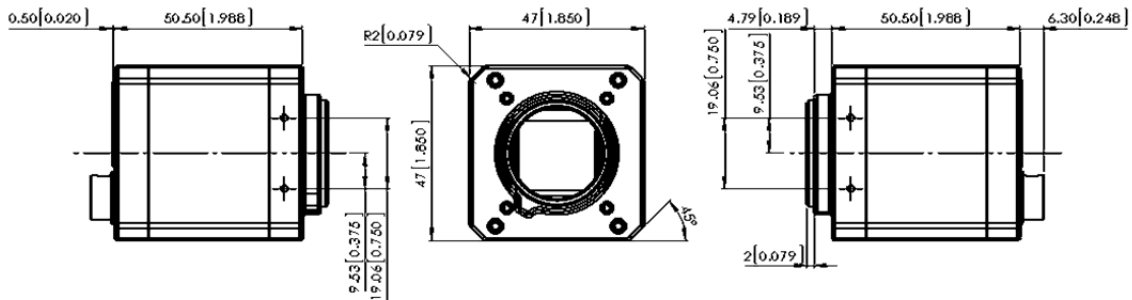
Basic Mechanical Dimensions of the NOCTURN GV Camera (all dimensions are in mm [in])
